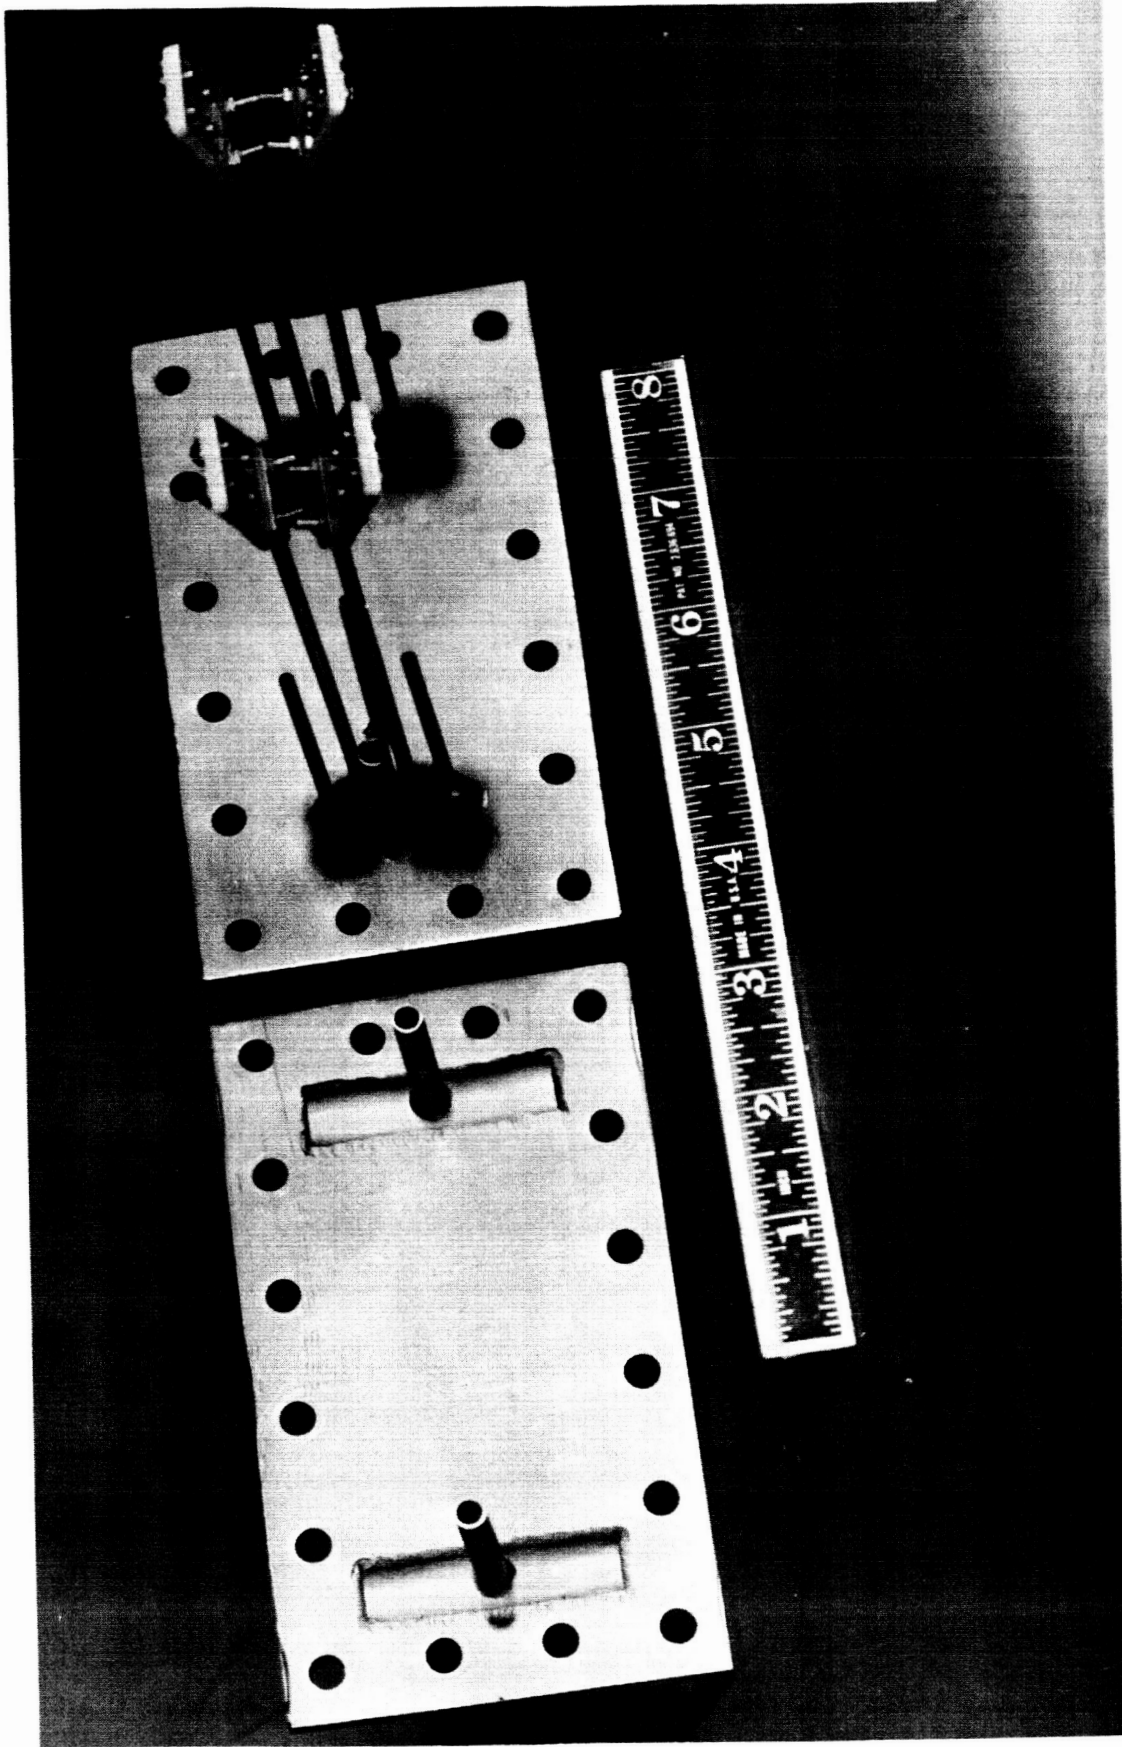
Outside View of Disassembled Wick Sample Holder, Showing Flow Inlet and Outlet and Instrumentation
